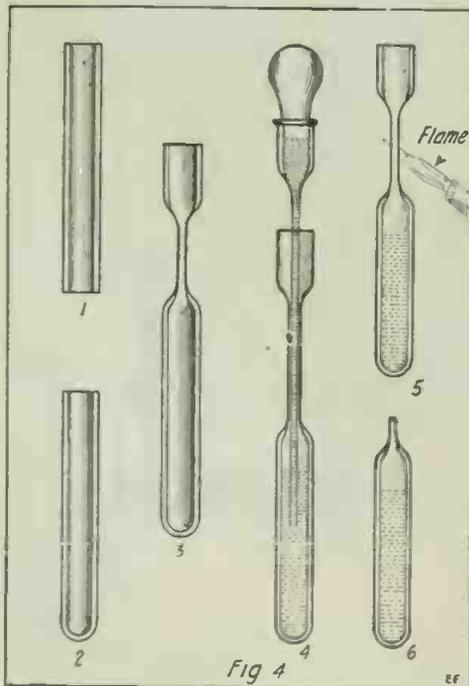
Successive Operations in Making a Glass "Ampoule": 1. Tube Drawn Out; 2. One End Closed; 3. Tube Drawn Out; 4. Filling; 5. Sealing; and 6, the Finished "Ampoule."
